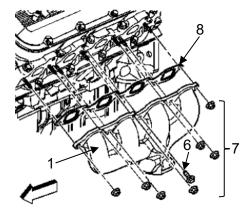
Exhaust Manifold (1), Exhaust Manifold Gasket (8), Exhaust Manifold Nuts (7) and Bolt (6)
